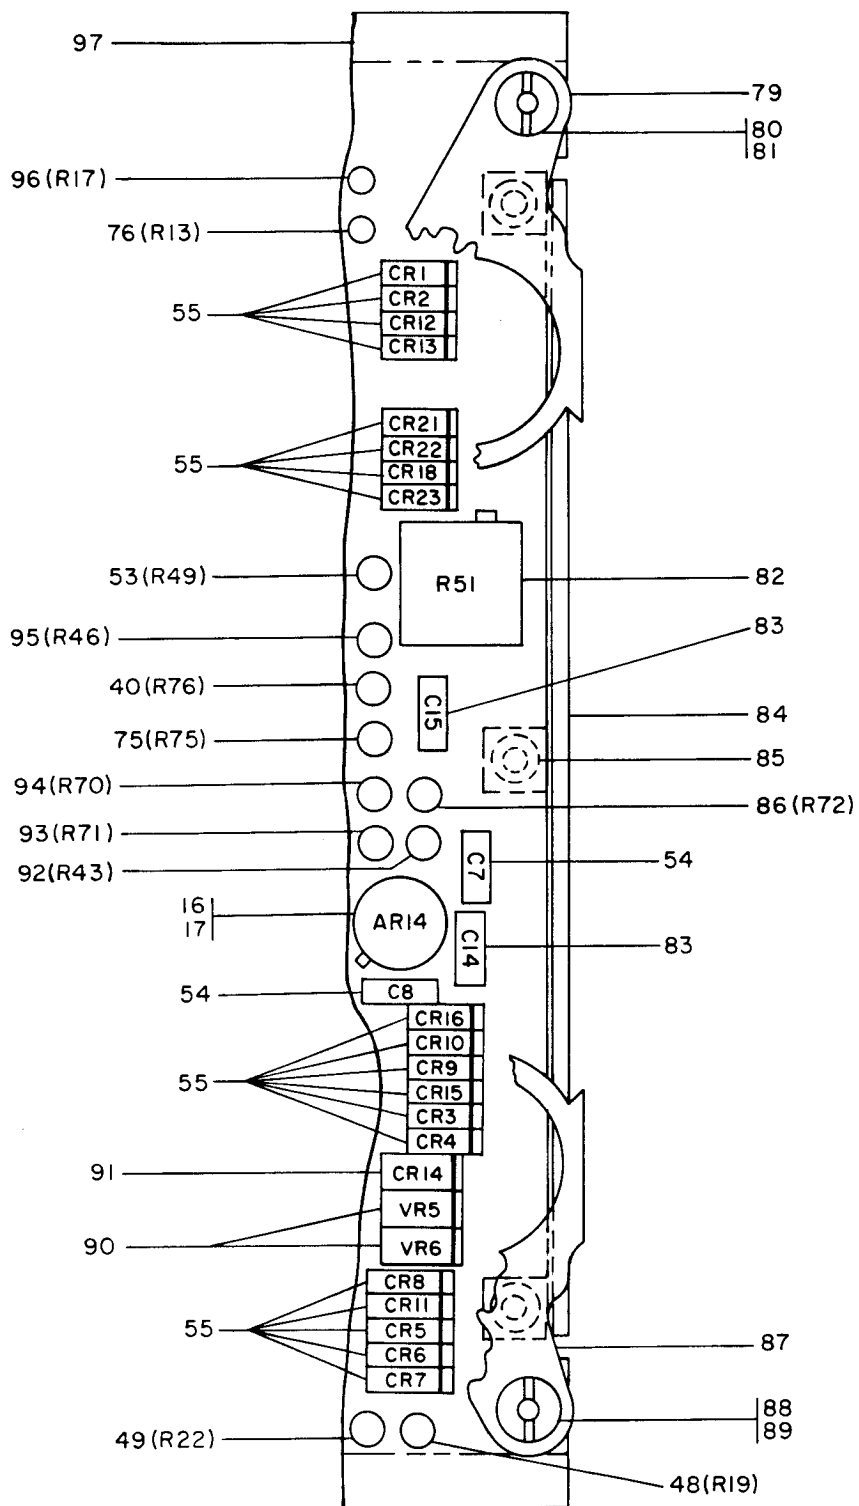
Circuit Card Assembly (A2) (Sheet 2)
